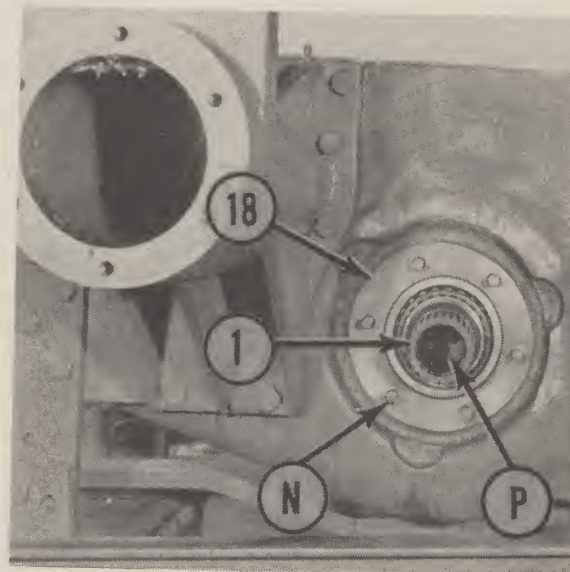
Left side view 6 speed tractor showing bull pinion ready for removal. To remove bull pinion (1) and bearing as a unit, extract plug (P) and engage puller on inside shoulder of pinion.
